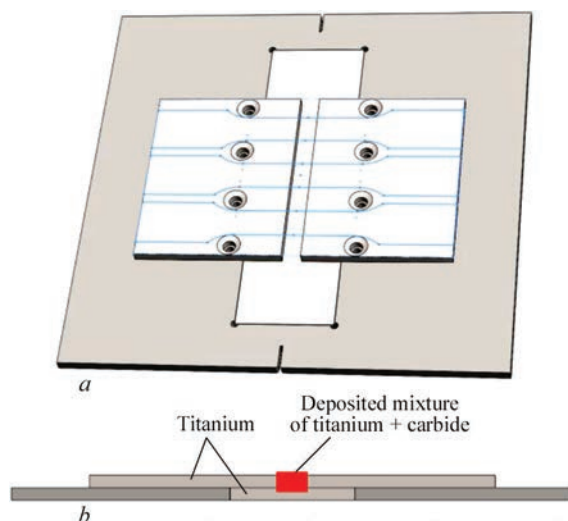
Schemes of sample layout when welding 4 mm sheets to determine the tensile strength of the weld metal
